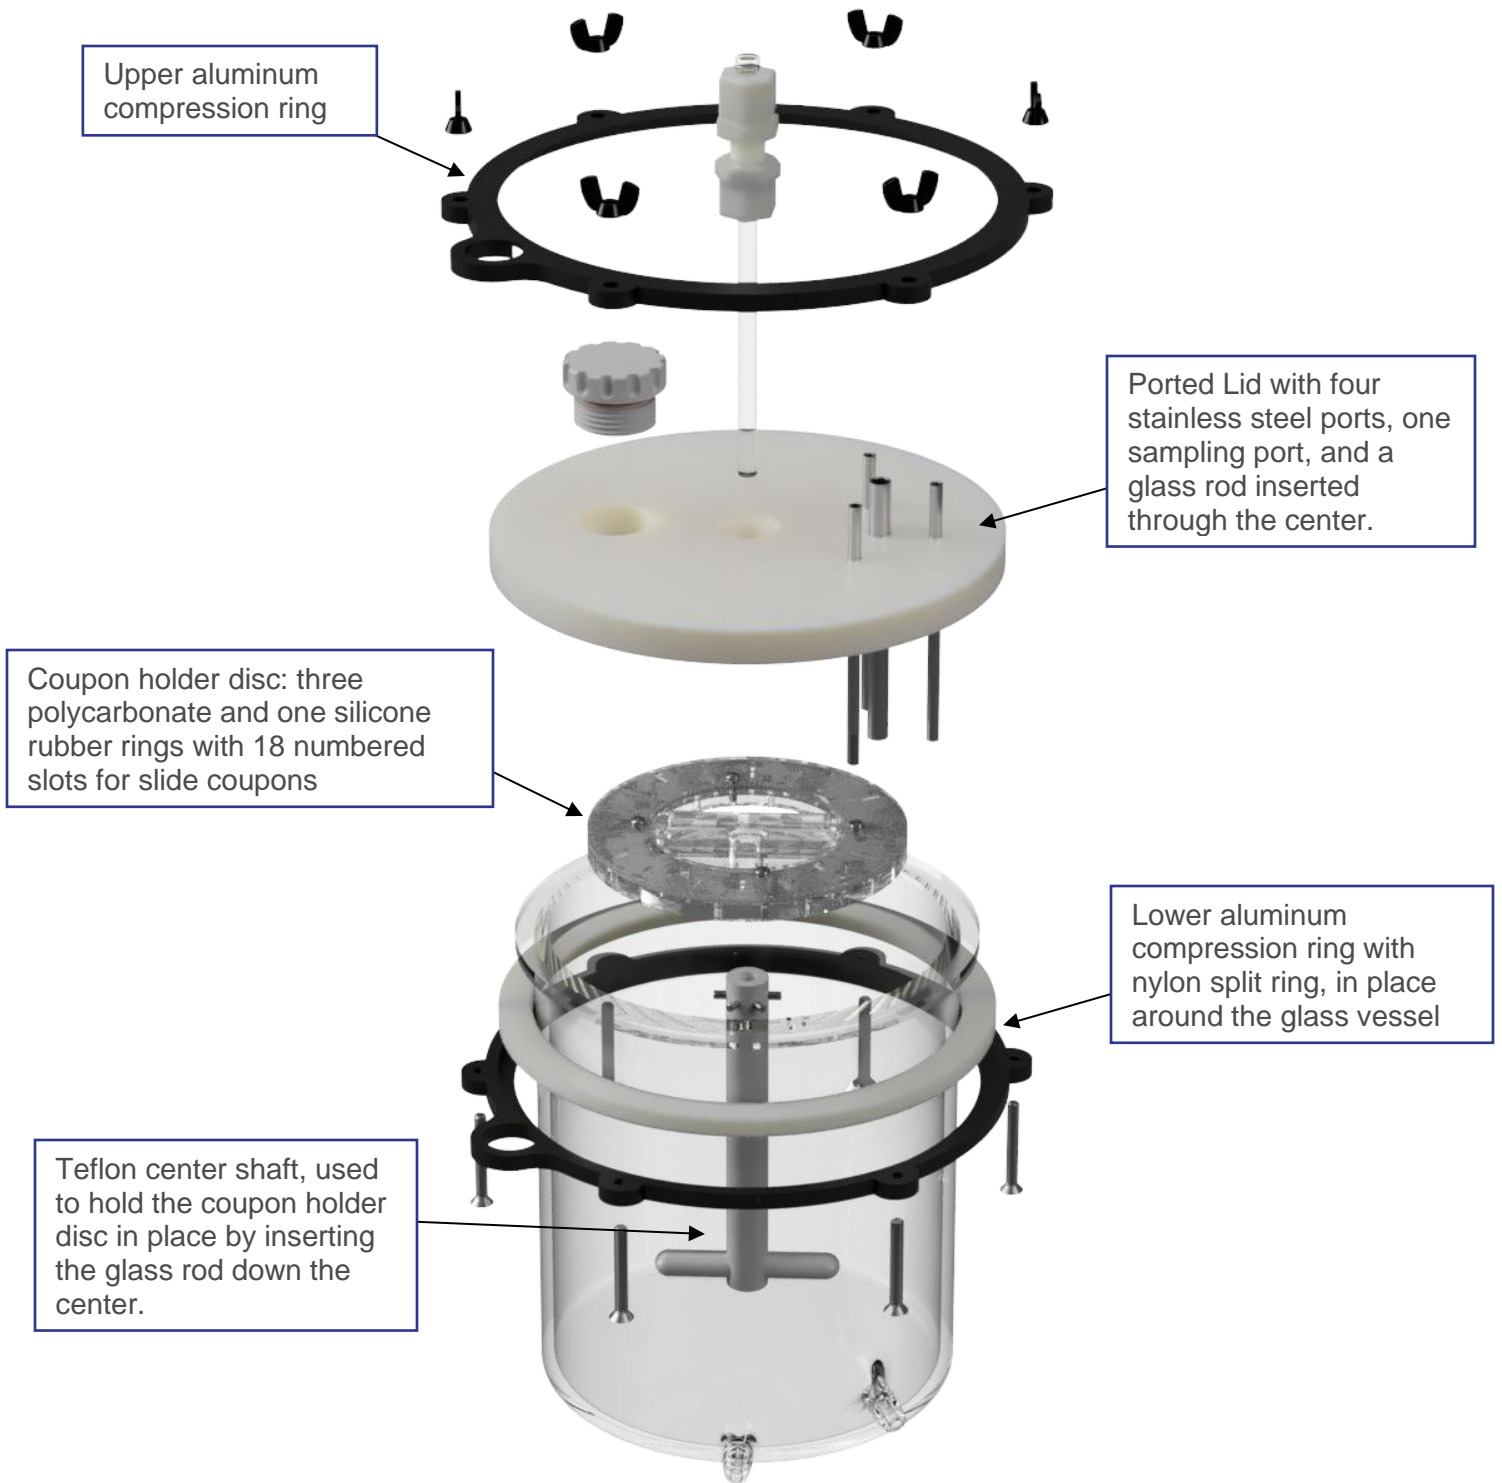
Exploded view of the Industrial Surfaces Biofilm Reactor.
